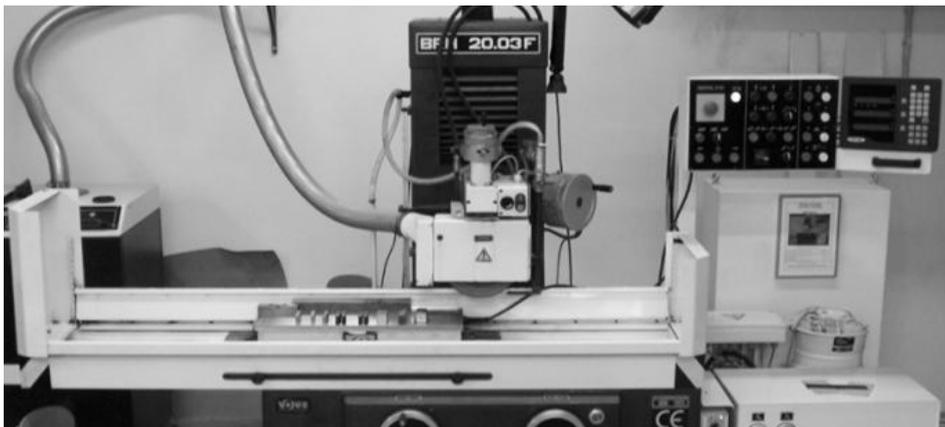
Overall view for CNC machine tool BRH 20.03 F.
